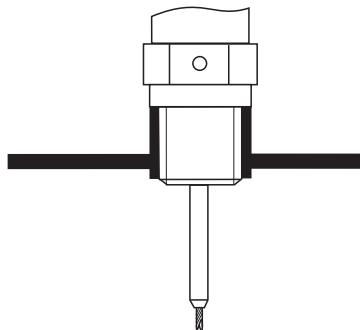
Mounting with threaded connection; flush with the container ceiling
